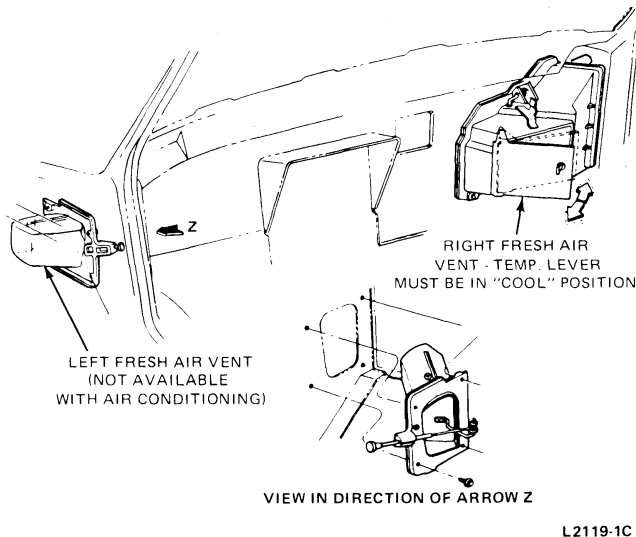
E-100 Through E-350 Outside Fresh Air Vent Assembly
